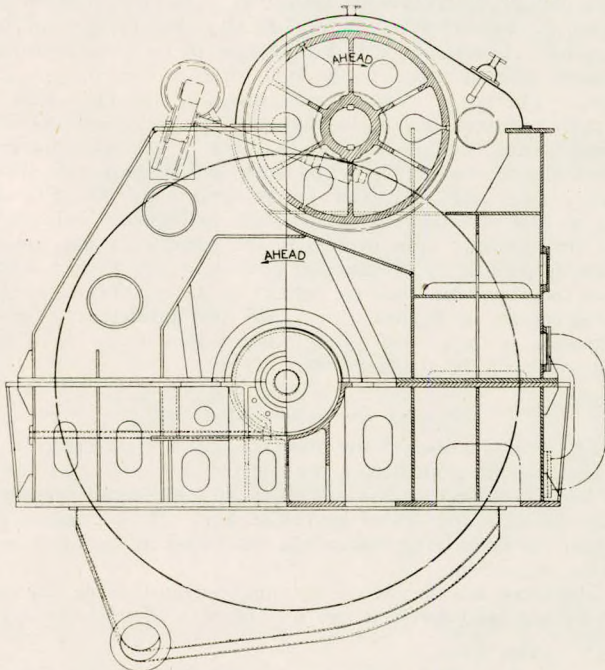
Arrangement of reversible gear train with hydraulic coupling and torque converter (Pametrada design)
